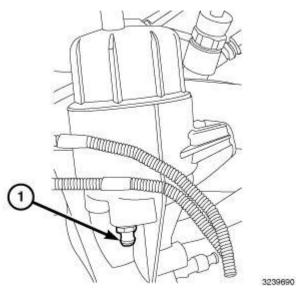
Oil Filter Housing Bleeder Screw Courtesy of CHRYSLER GROUP, LLC
